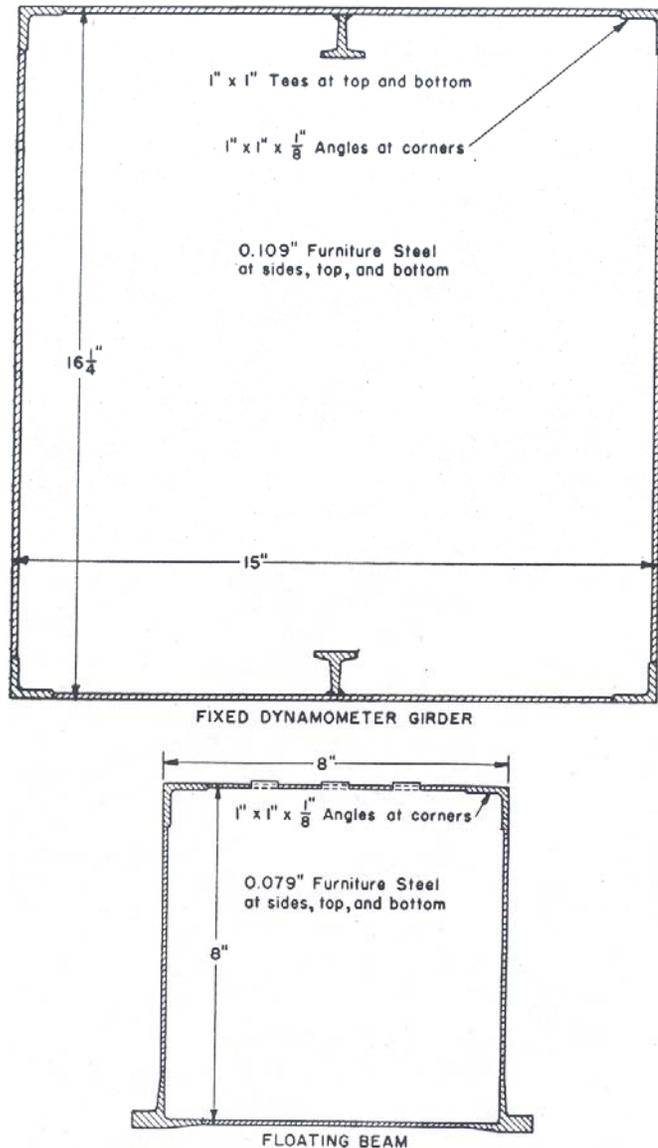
SECTIONS OF FIXED DYNAMOMETER GIRDER AND FLOATING BEAM
